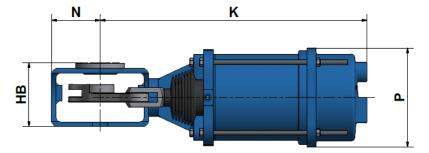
Dimensional drawing for Type R Actuators with VETEC bracket
